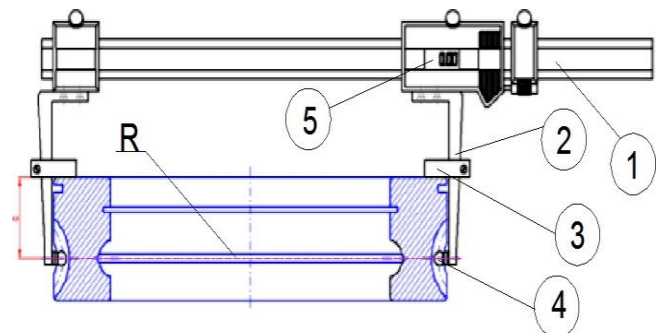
Measurement of the pitch circle using balls (1 – caliper; 2 – attachment; 3 – head restraint; 4 – measuring ball 8.5; 5 – digital display; M – dimension through the balls “dk1”; dk1 – diameter of the measuring ball; c – distance of the axial plane; R – radial plane)
